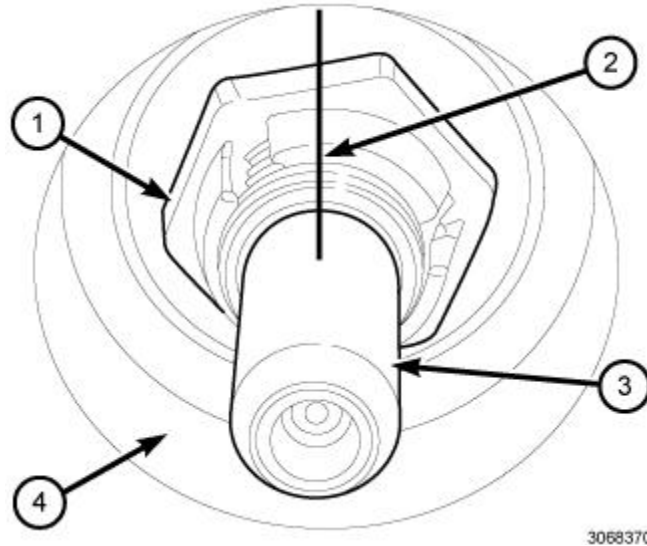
Identifying Alignment Mark On Pinion Flange, Nut & Pinion Shaft
